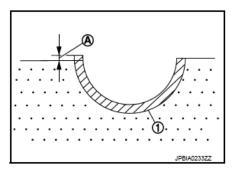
Identifying Connecting Rod Bearing Crush Height Courtesy of NISSAN NORTH AMERICA, INC.
